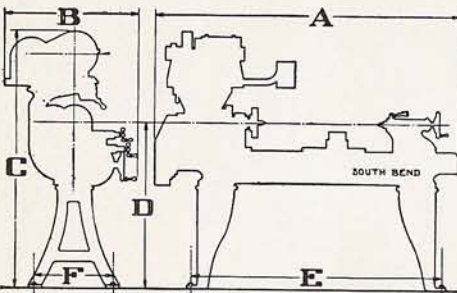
Floor Leg Lathe, Silent Motor Drive
